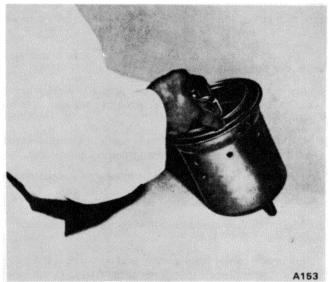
D-11. Installing Piston Assembly eight capscrews used to secure the spring support to the cylinder. Alternately tighten each capscrew.
